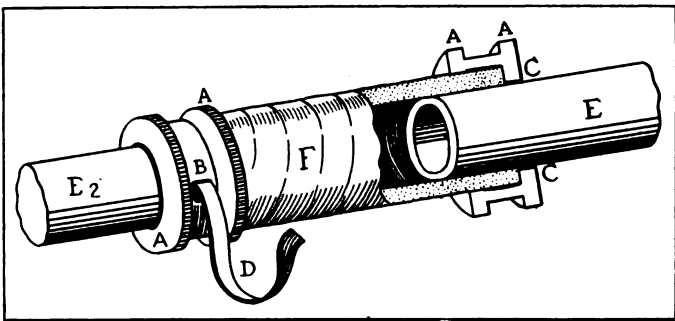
Neat water tube joint—clamp at one end shown in section.
